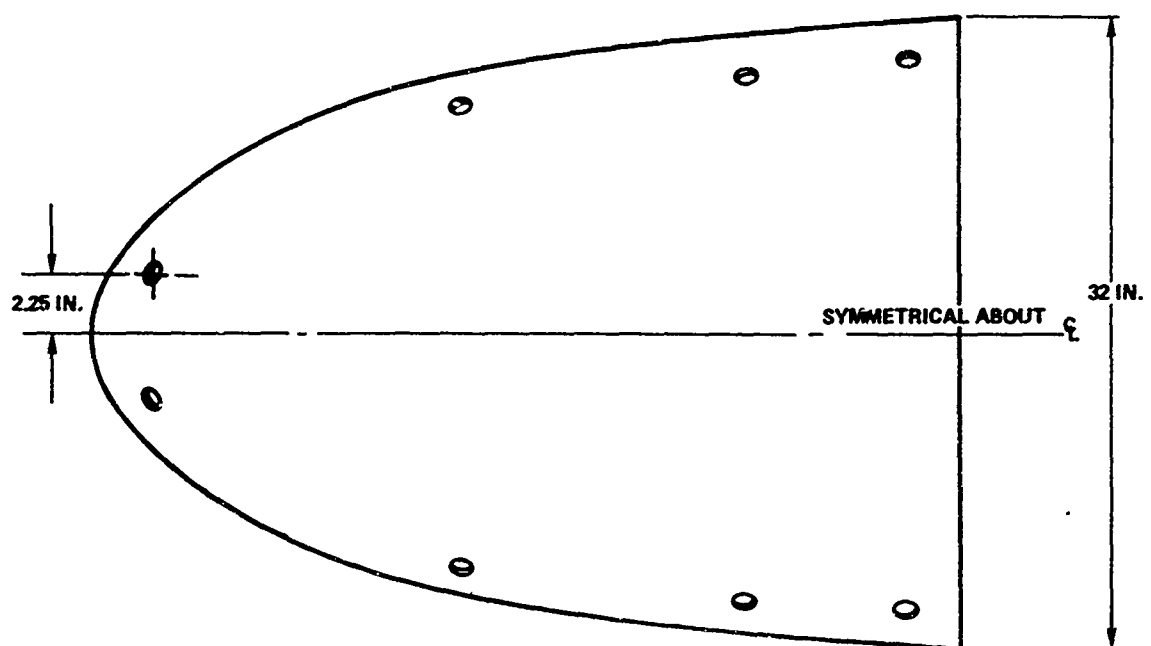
Single-Piece Cone Wedge Section Type Windshield Attach Bolt Locations
